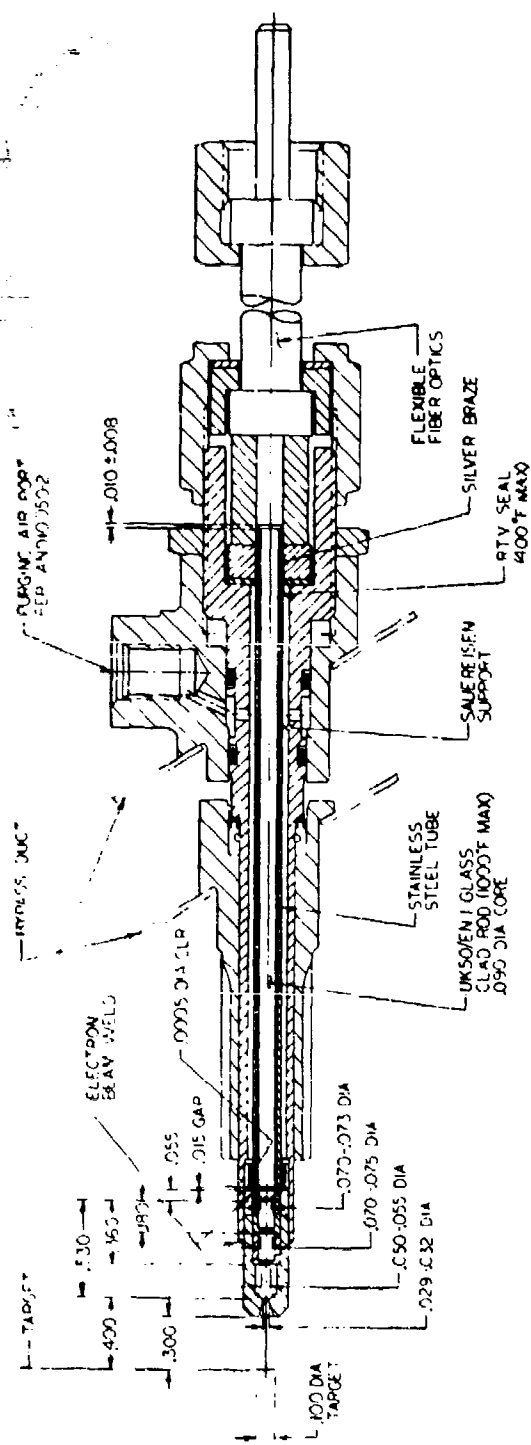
RADIATION PYROMETER LAYOUT DRAWING
